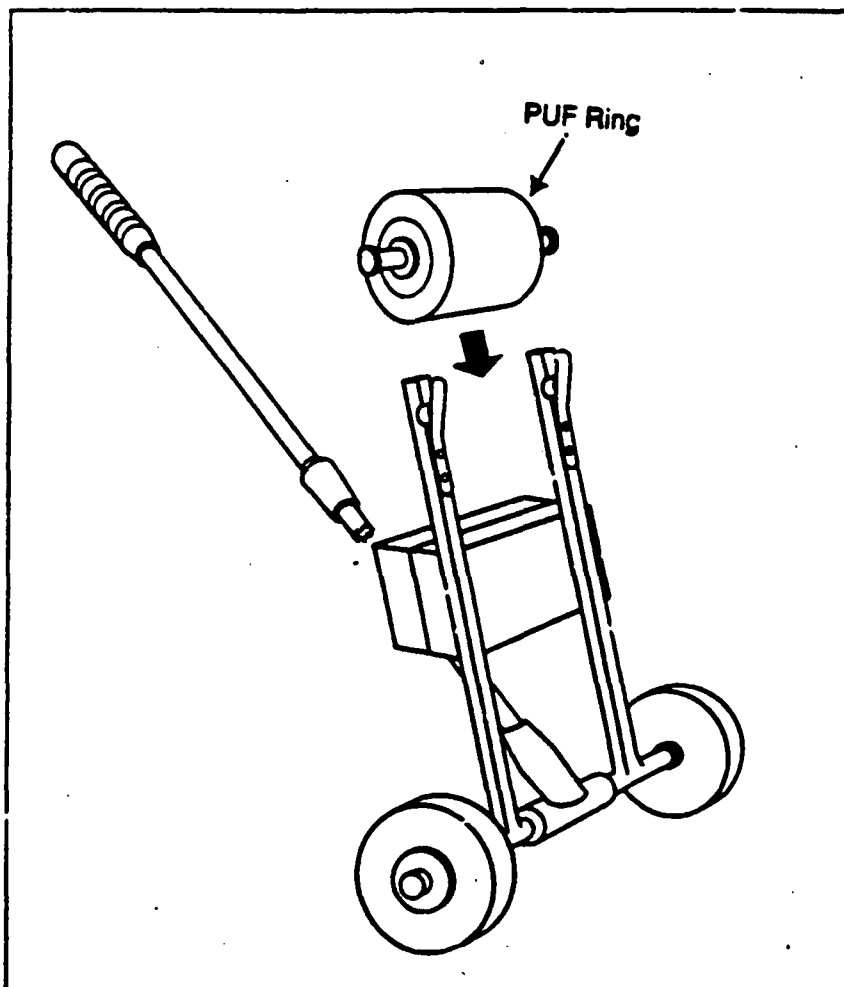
Details of cylinder/frame assembly of modified PUF roller sampler.
